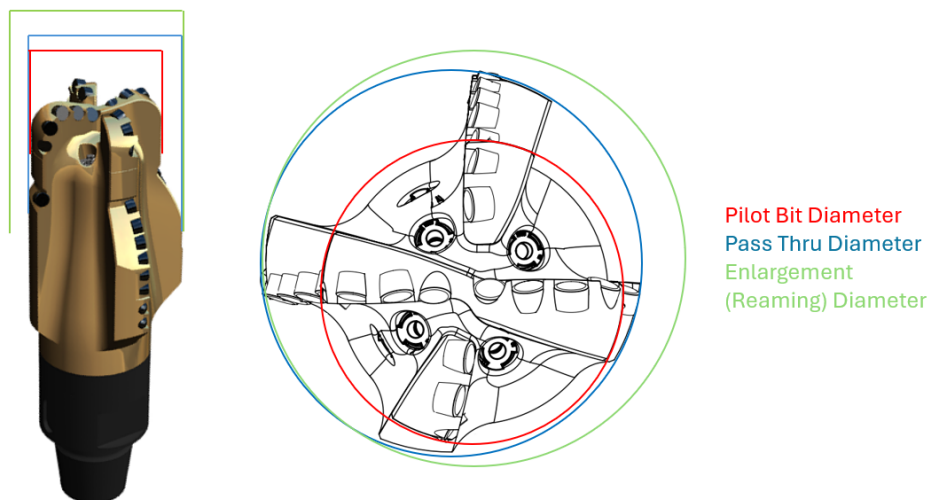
three dimensional render image of hole enlargement tool and top view drawing with eccentric diameters.
